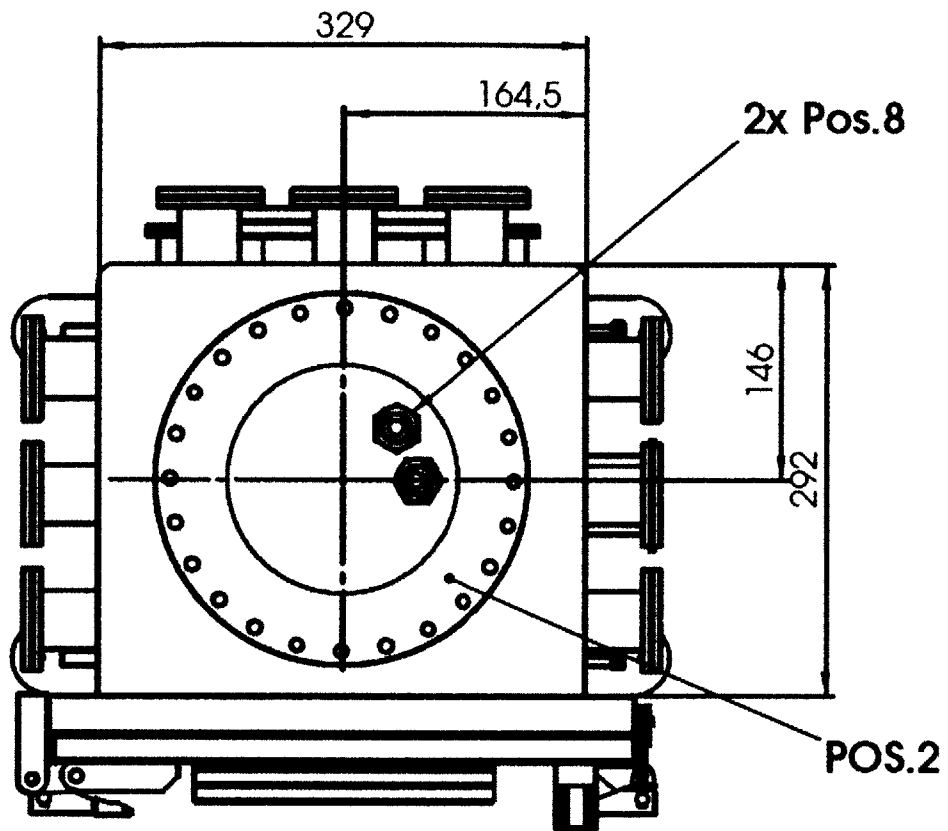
oCVD chamber engineering drawings – top down view of chamber
